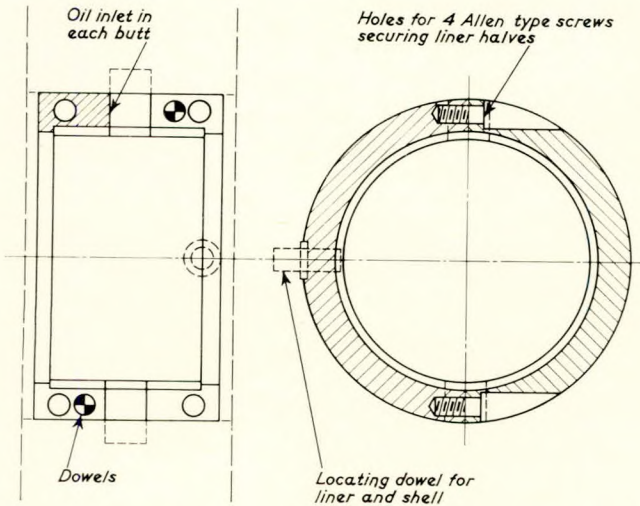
Y.100 Mark II—Arrangement of journal bearing
